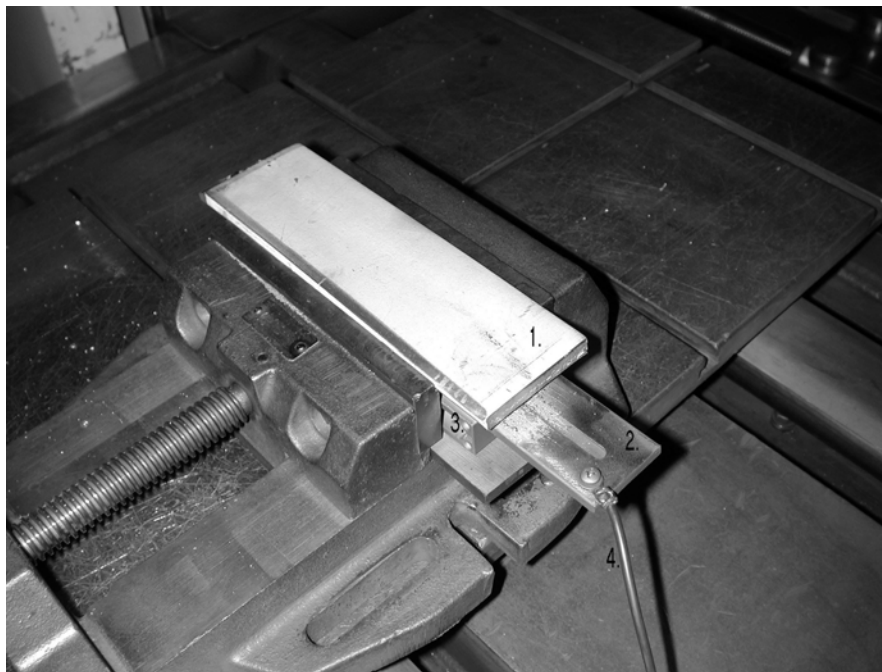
A detail from the experimental set-up of welding tests. Numbered parts: 1. test piece to be welded, 2. copper detector, 3. ceramic insulator, 4. wiring to the PC-unit.
